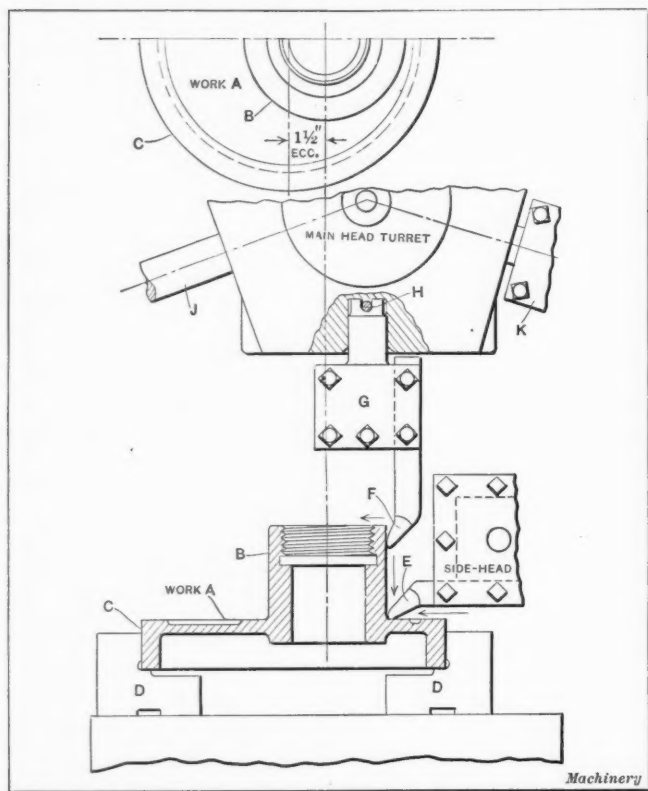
Method of machining Eccentric Hub on Vertical Turret Lathe
